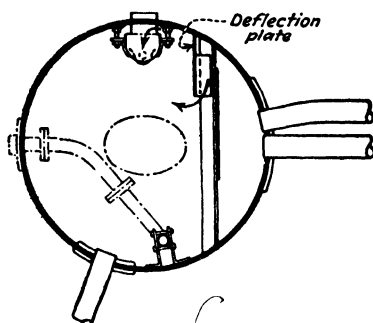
Dry pipe and baffle in a cross-drum boiler. (*Combustion Engineering Company.*)
